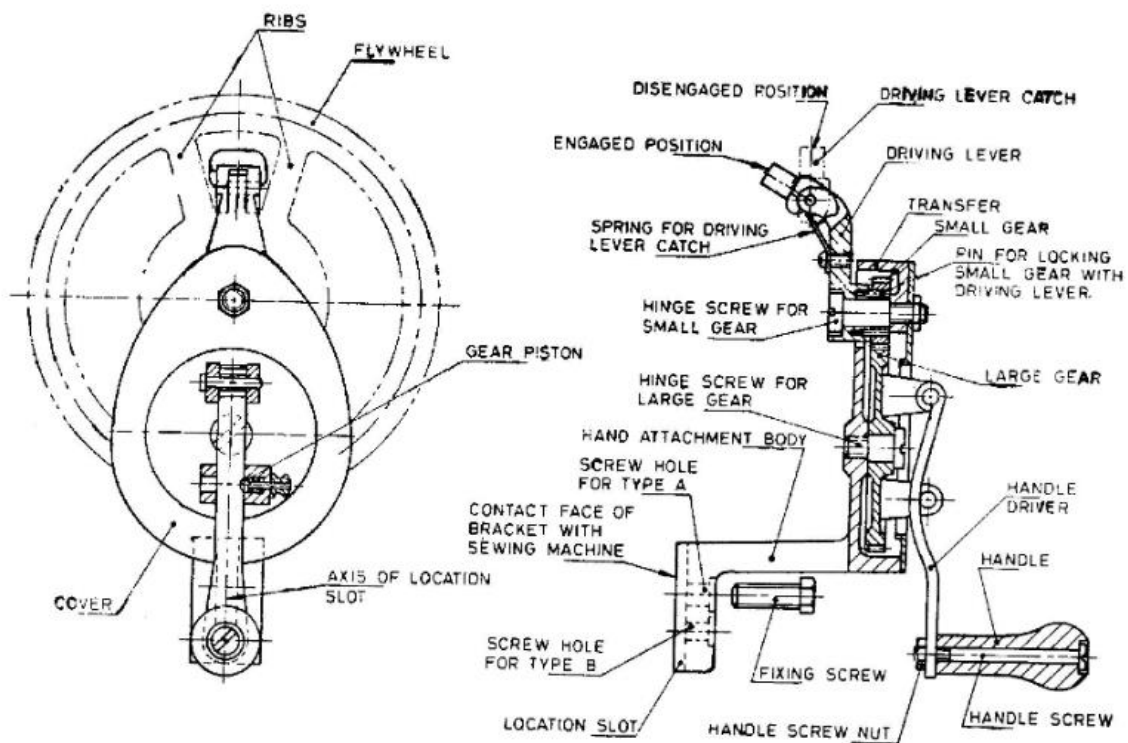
TERMINOLOGY FOR HAND ATTACHMENT ASSEMBLY
